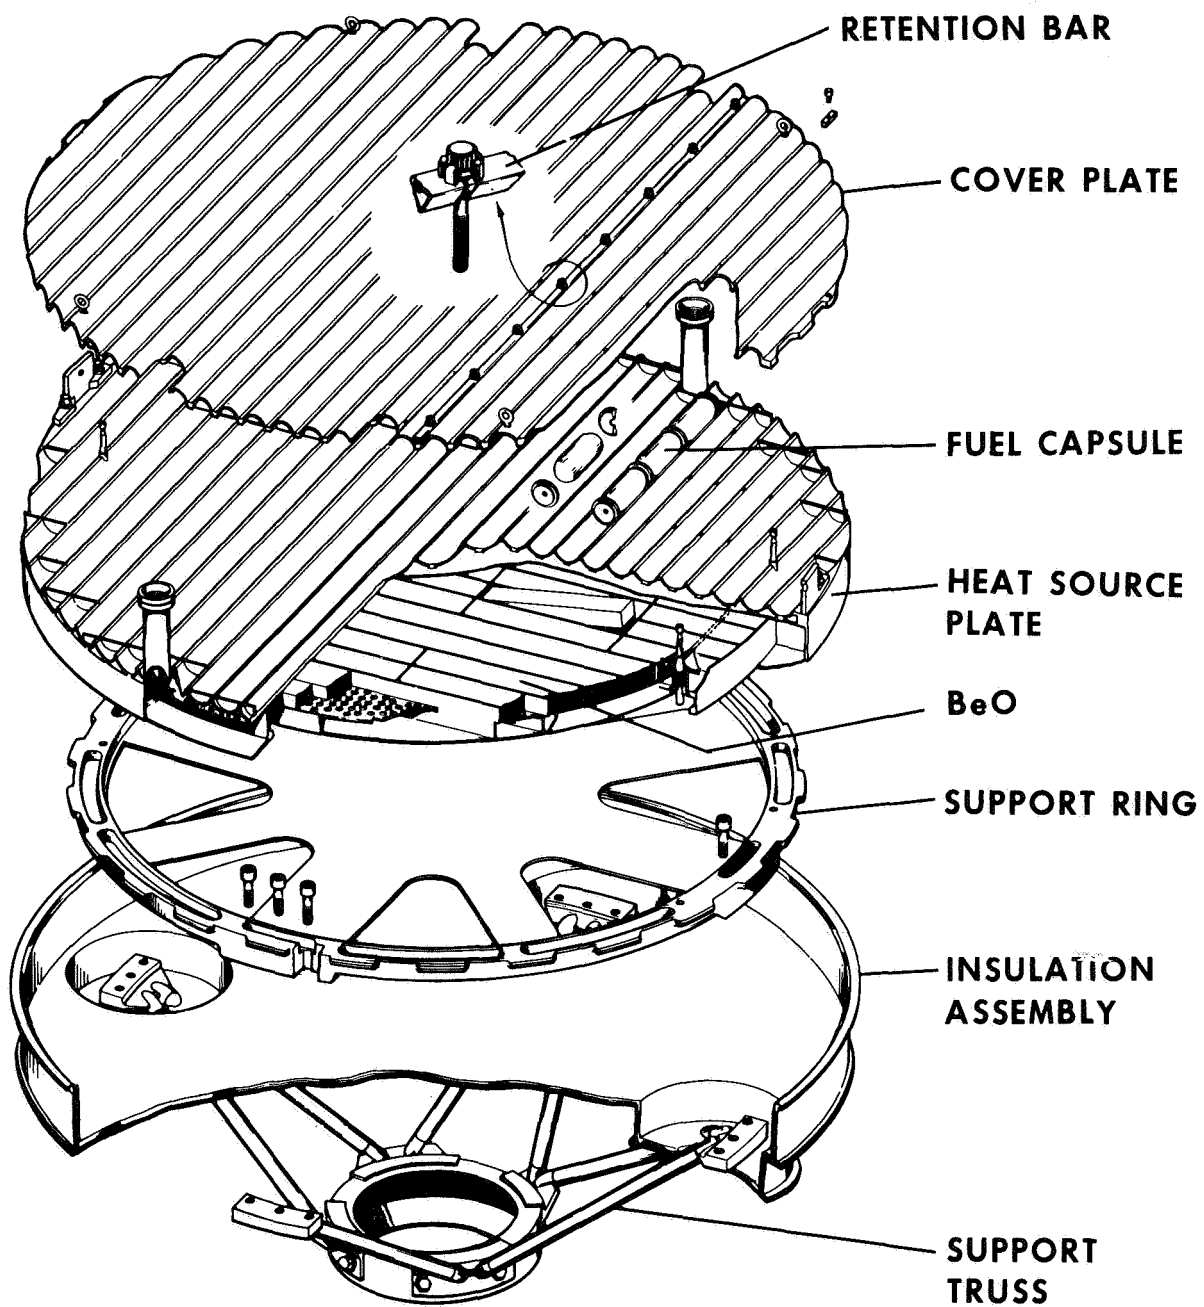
EXPLODED VIEW OF THE HEAT SOURCE PLATE
